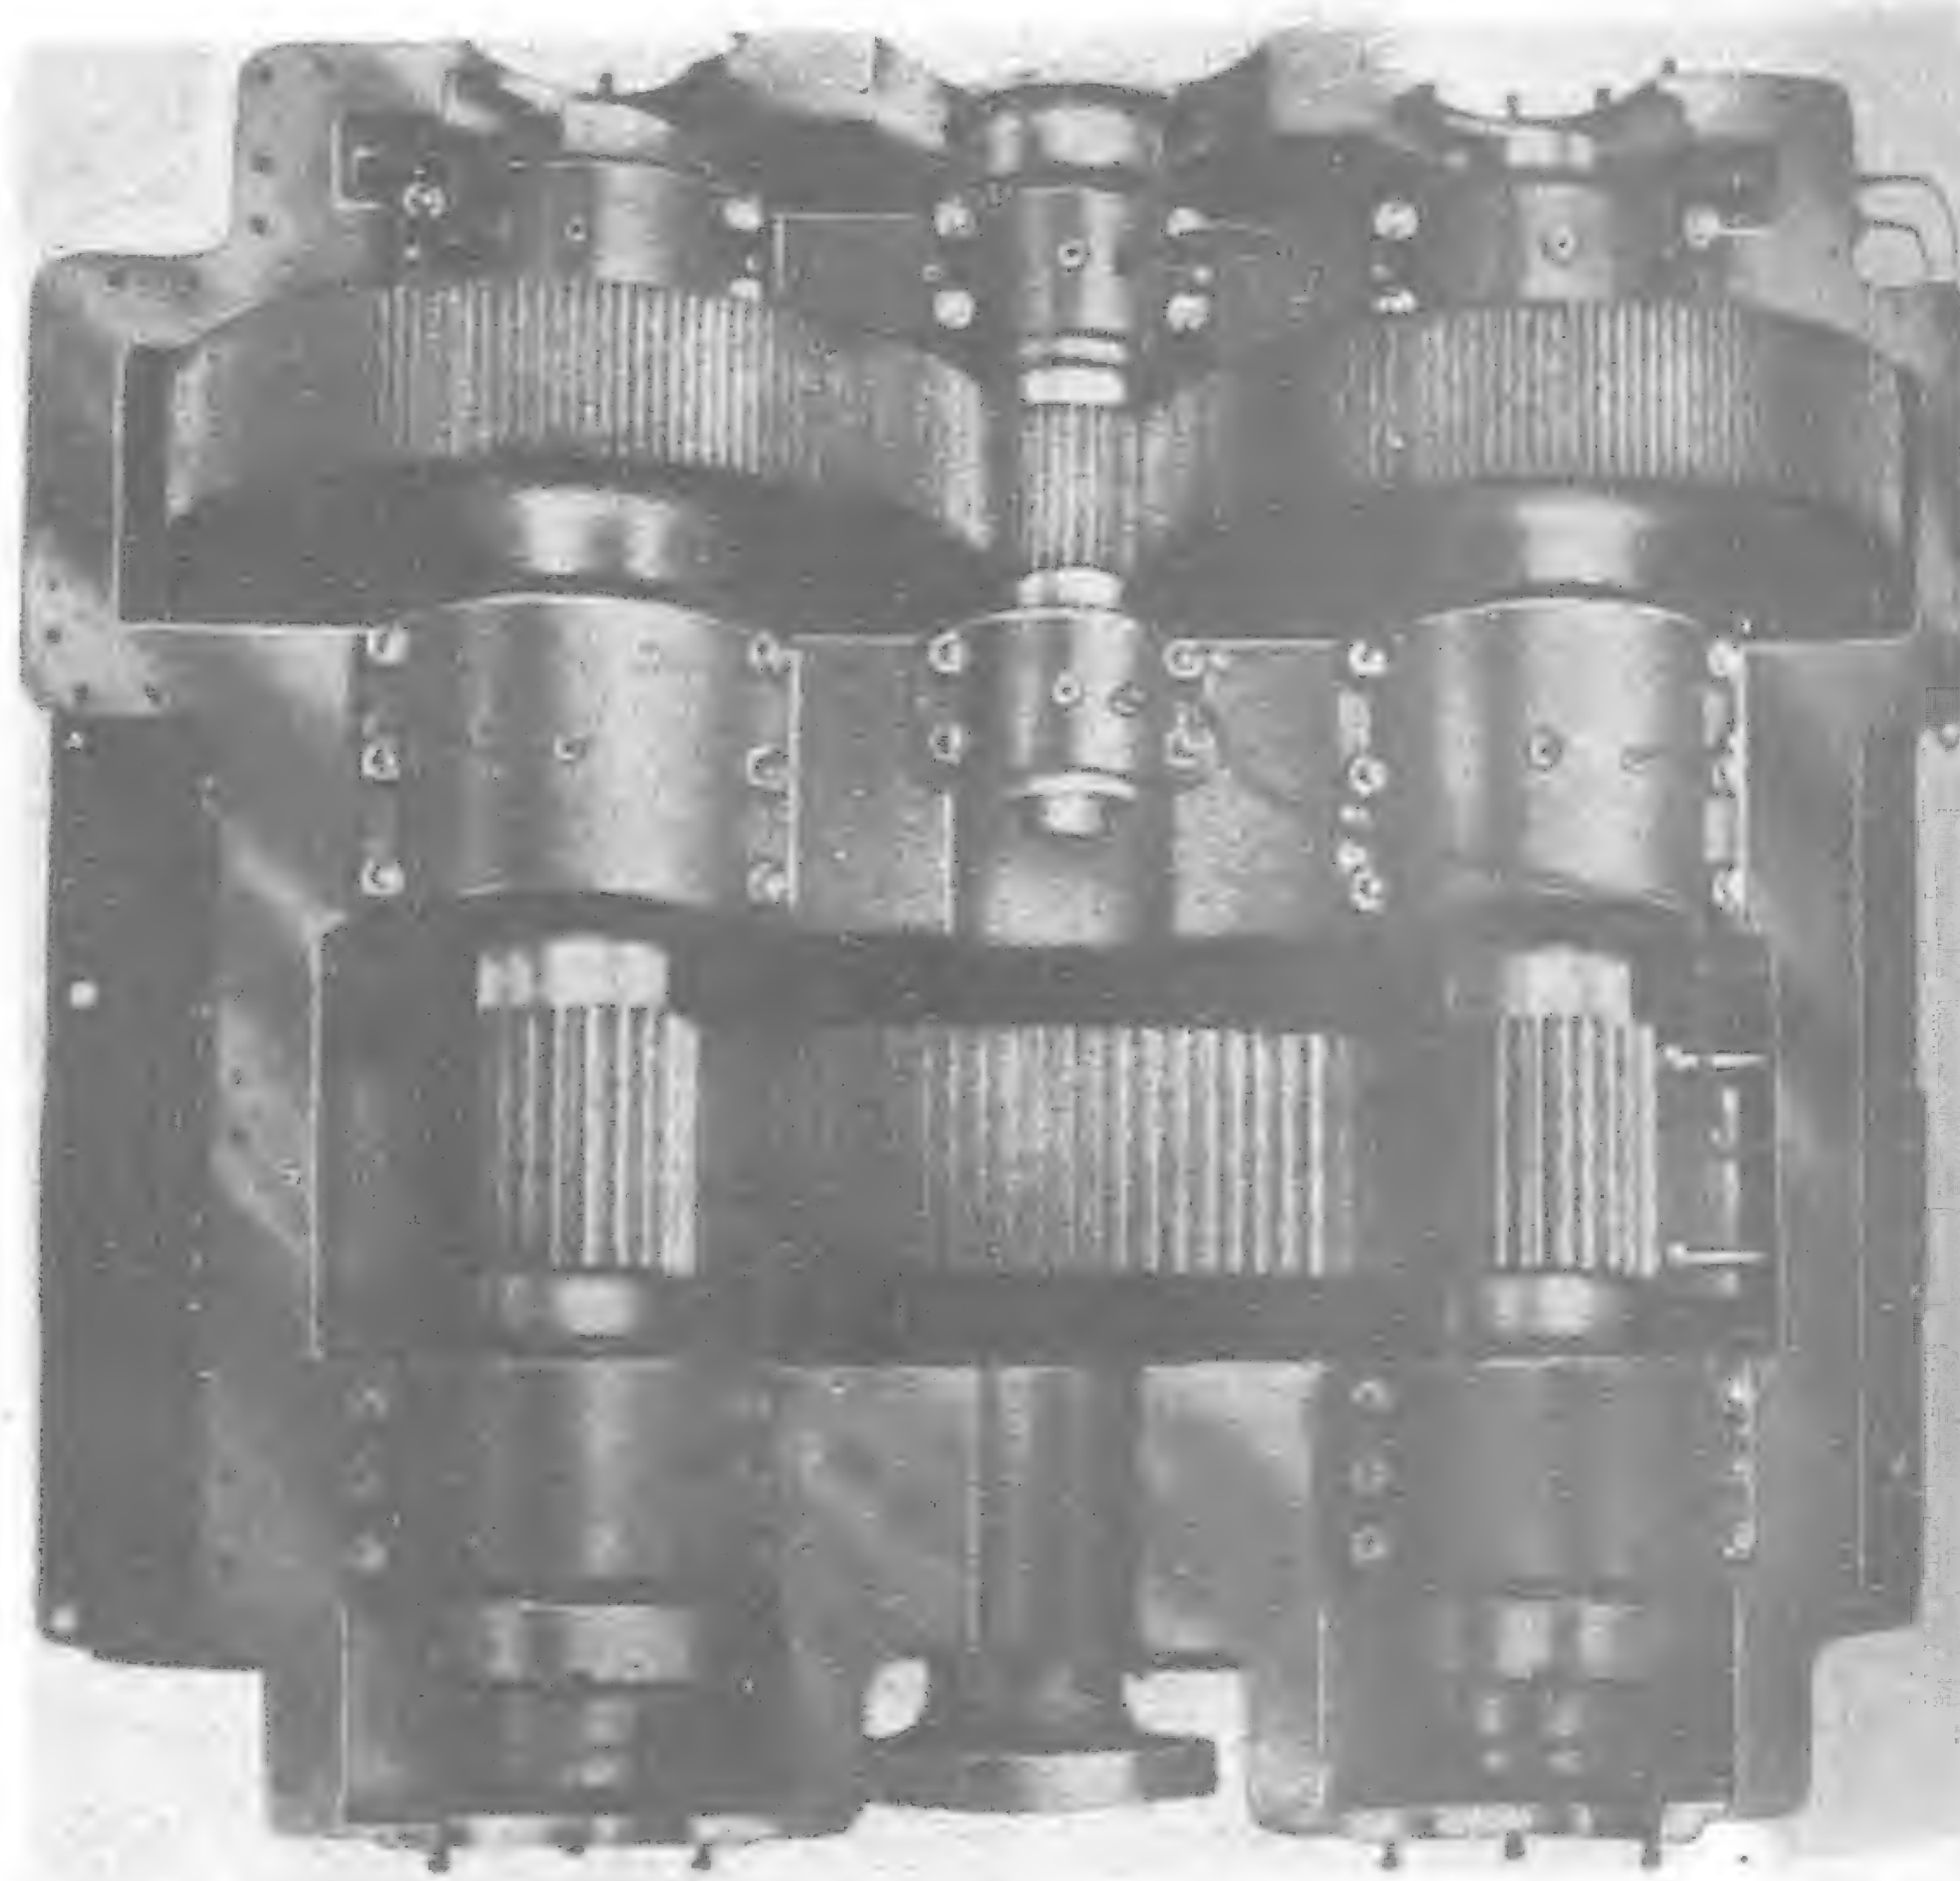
Marine Reduction Gear with Mang Gear of Nickel-Chromium Steel. Manufactured by Ishikawajima Ship Building Co.
